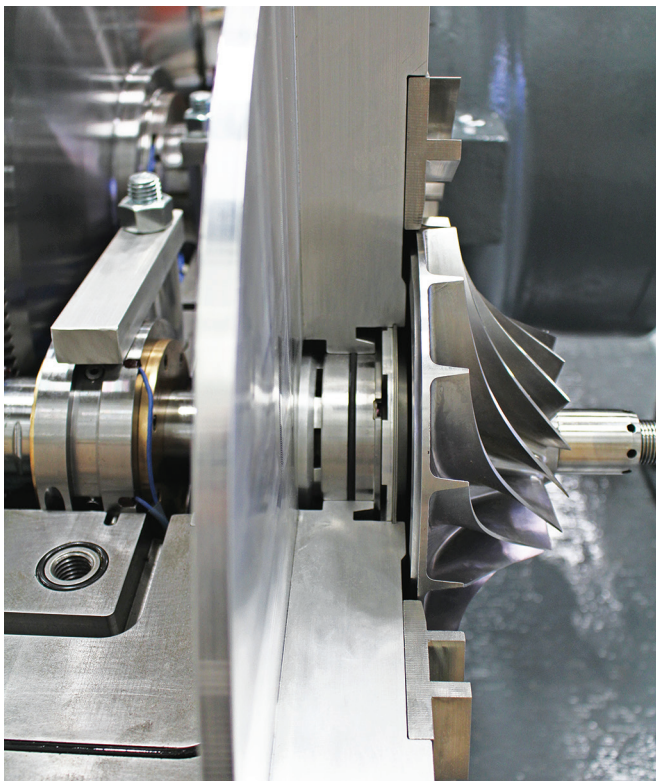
An installed dry gas seal, mounted at the back of the impeller.
